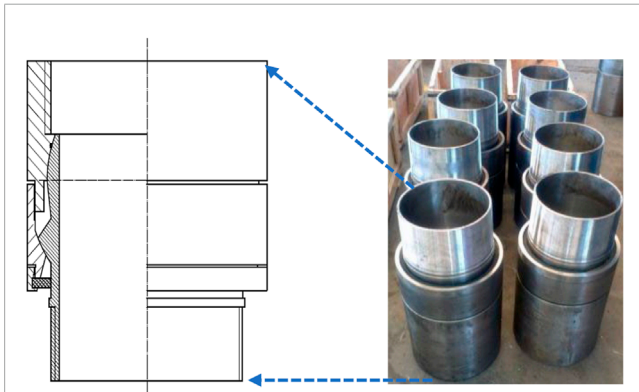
Assembly diagram and photograph of the deflection protection equipment.
